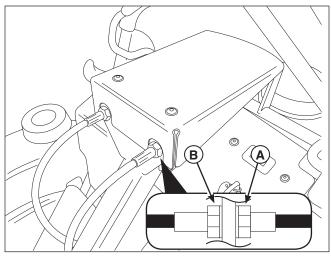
Speed Balancing Coarse Adjustment A. Inner Jam Nut
